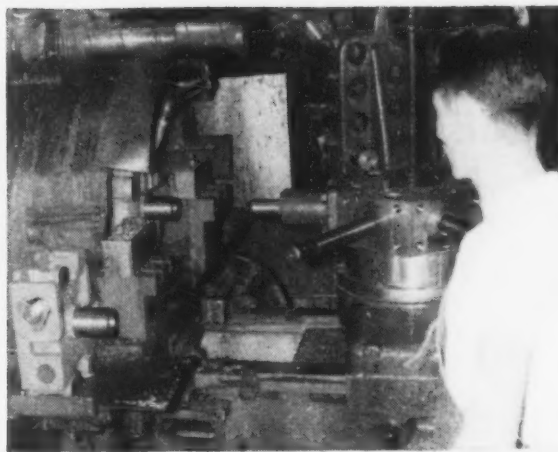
Several boring and turning operations are performed on pearlitic malleable iron housings by carbide tools in this Potter & Johnston turret lathe.
